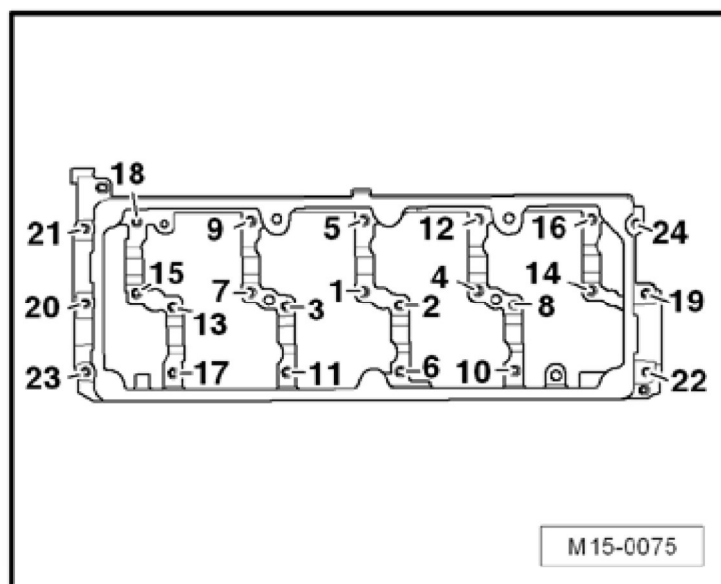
Identifying Bearing Frame Bolts And Nuts Tightening Sequence
